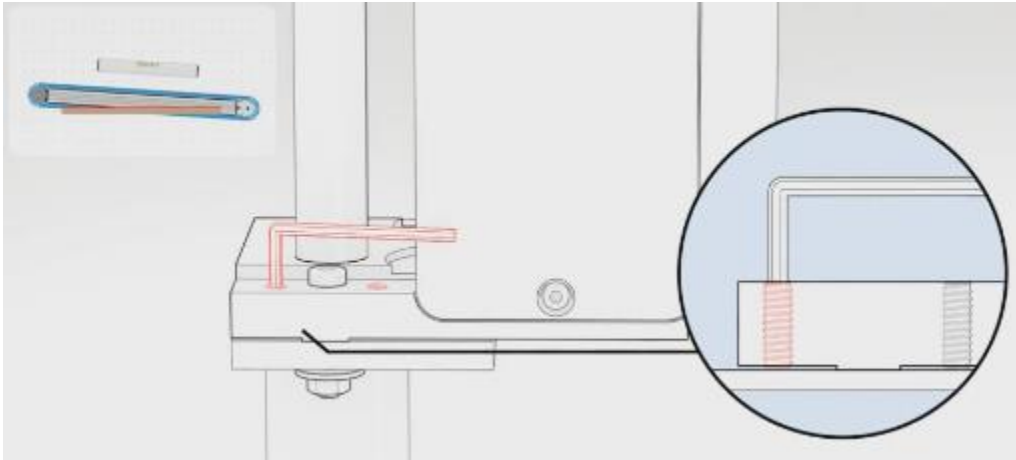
Example: Lifting one side of a cleaning module using a grub screw
